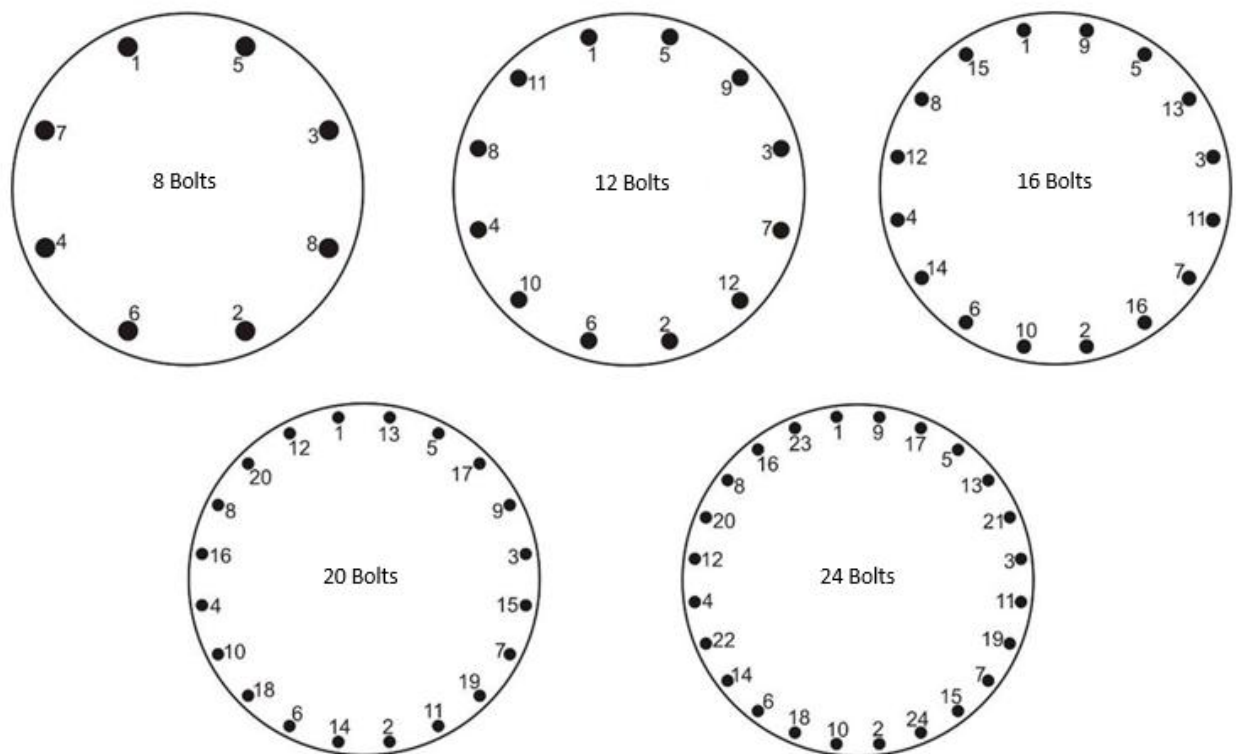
Bolt tightening method 1: Criss-cross tightening pattern
